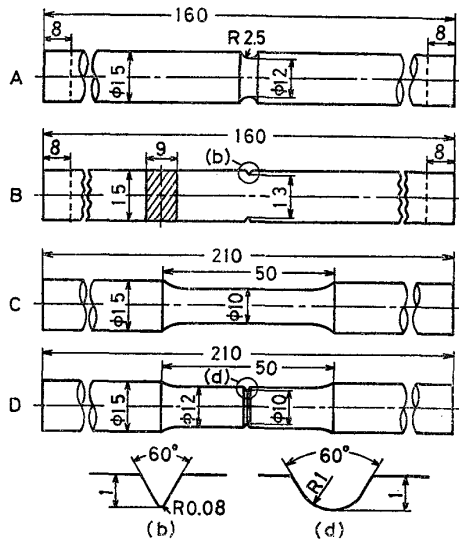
Test piece, (A, B: impact bending fatigue, C, D: rotating bending fatigue).
